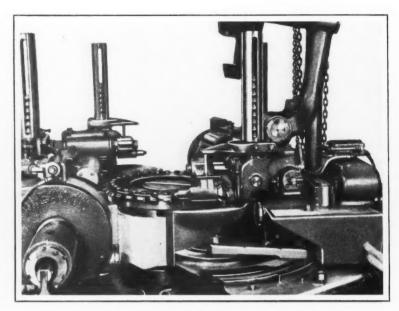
View of the Disk Milling Cutter which Cuts Four Blanks at a Time on the Gleason Gear-cutting Machine
